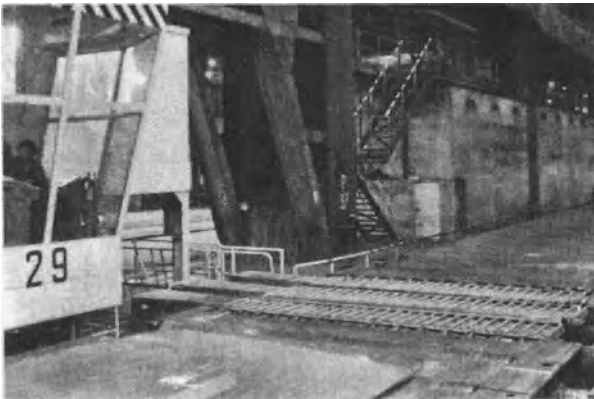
Test installation for heavy plate using broad-beam TR probes from beneath (design Krautkrämer, courtesy of Dillinger Hütte, Dillingen)
